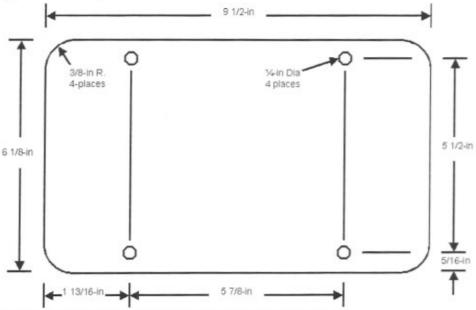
Collins 516F-2 power supply front-grill backing-panel dimensions.
